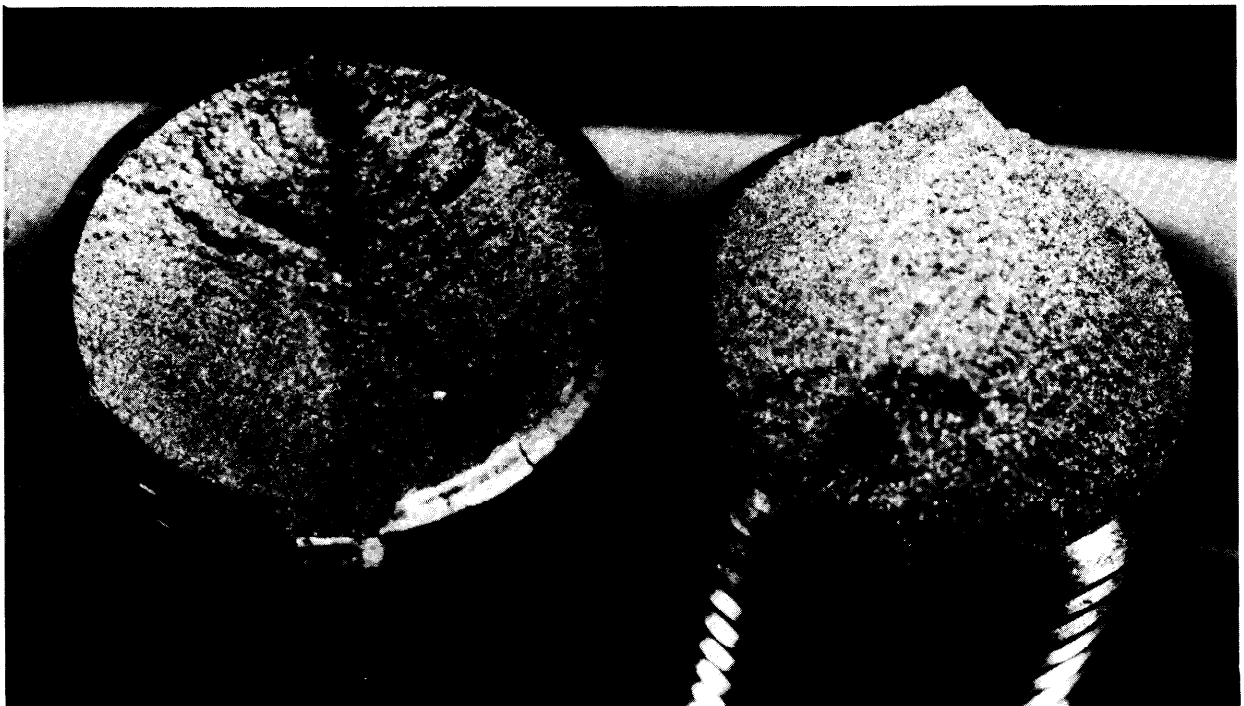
Macro photograph of Fracture Surface of 97 Percent Tungsten Penetrator at Root of Rearmost Loaded Lug
